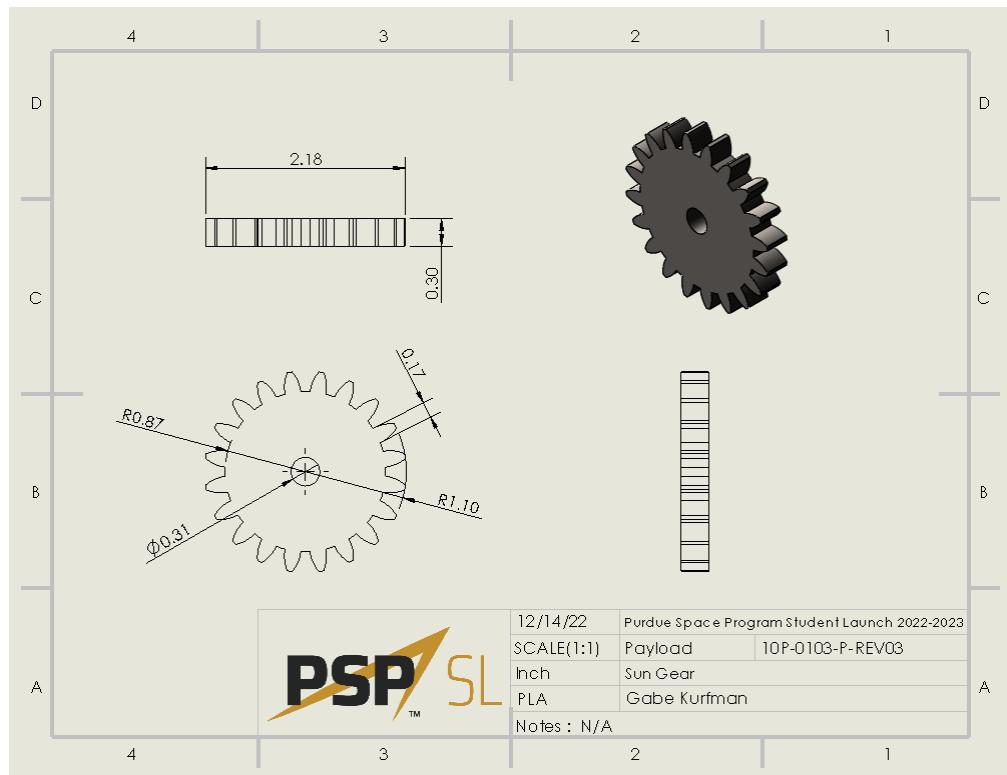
IOS Sun Gear Technical Drawing
